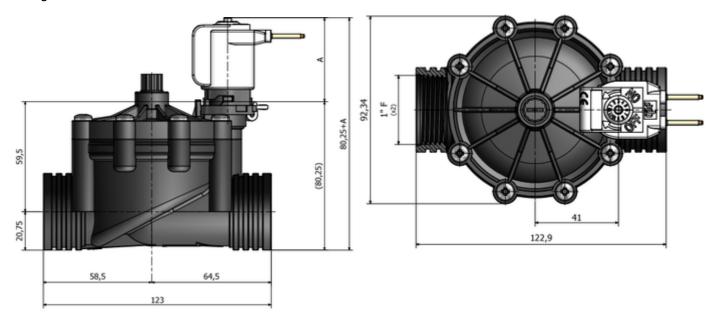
Dimensions of the valves in the 3-730 series
